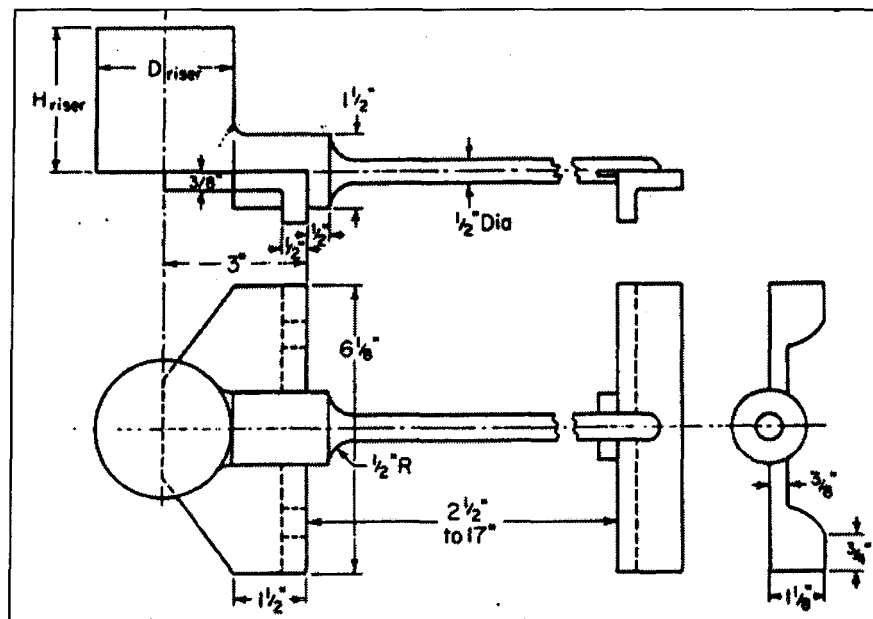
A schematic illustration of a Constrained Bar Casting mold [3].
